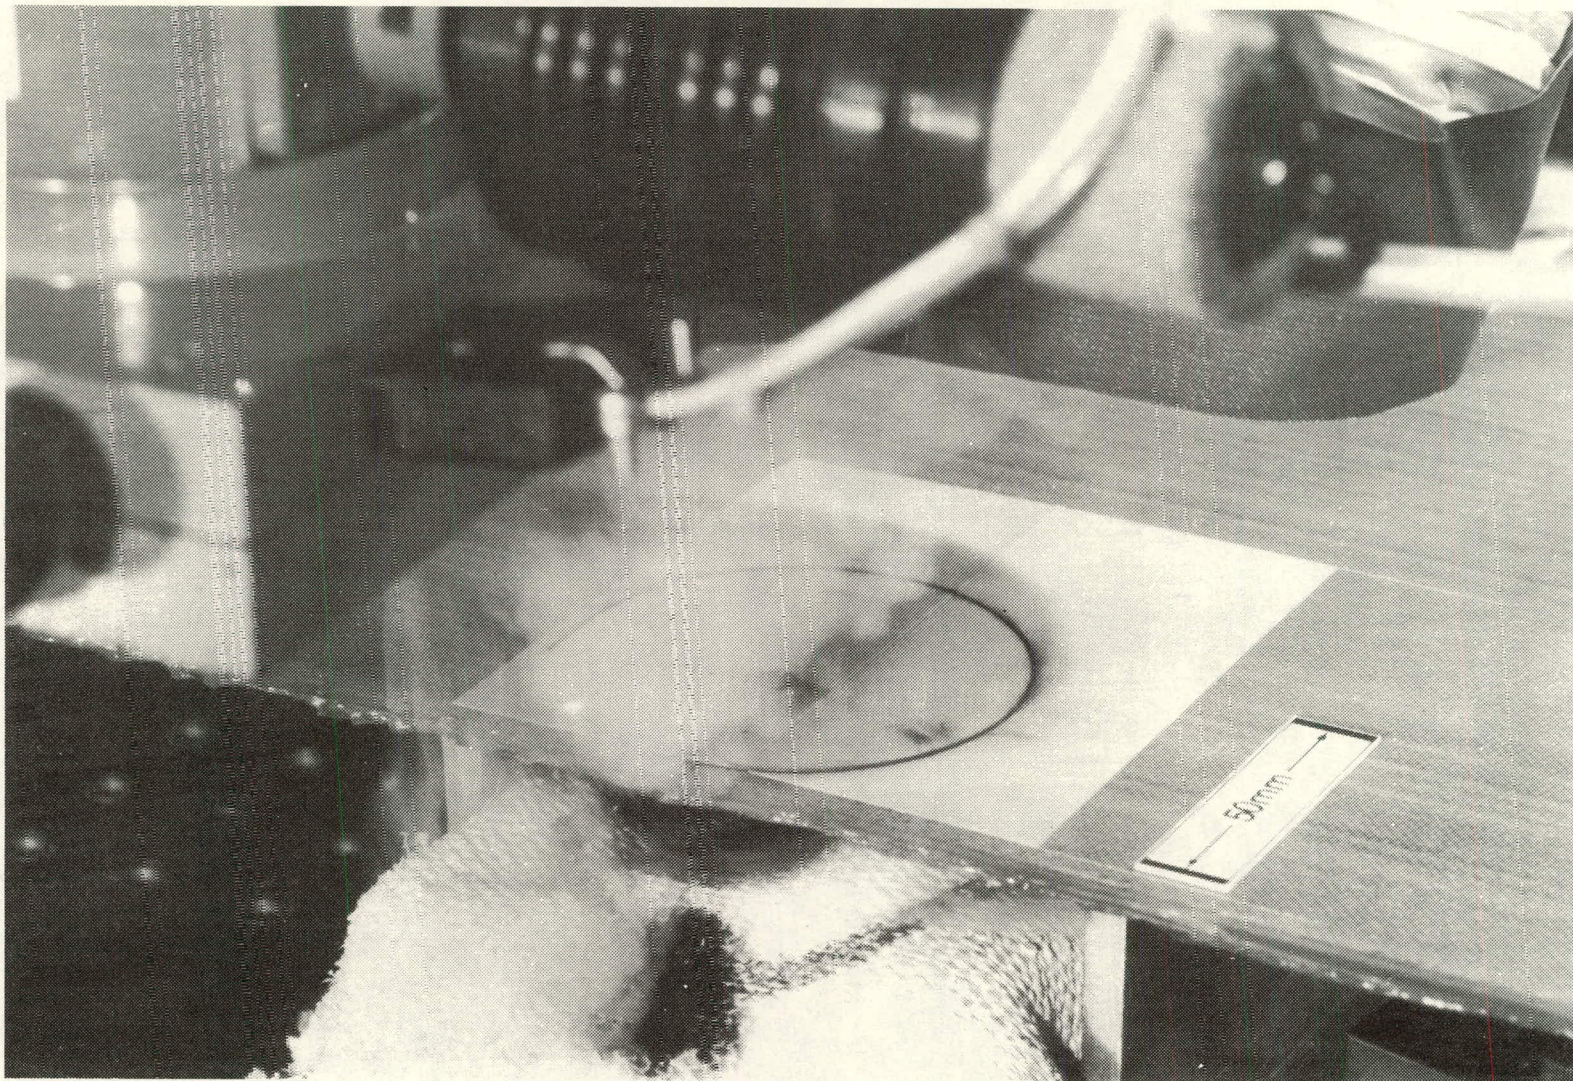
Laser Cutting 3.56-mm-Thick Kevlar/Epoxy Laminate
